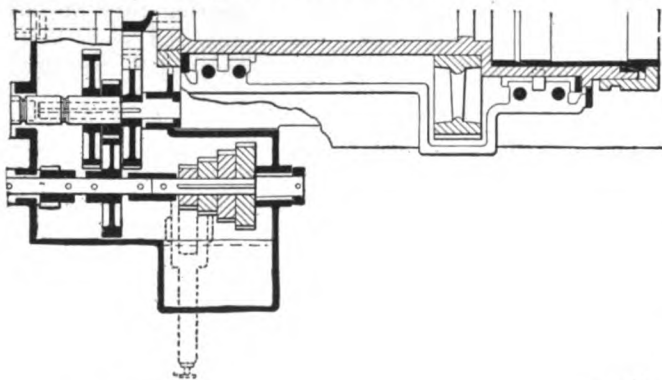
DETAILS OF NO. 6 HEAVY PROJECTILE TURRET LATHE
